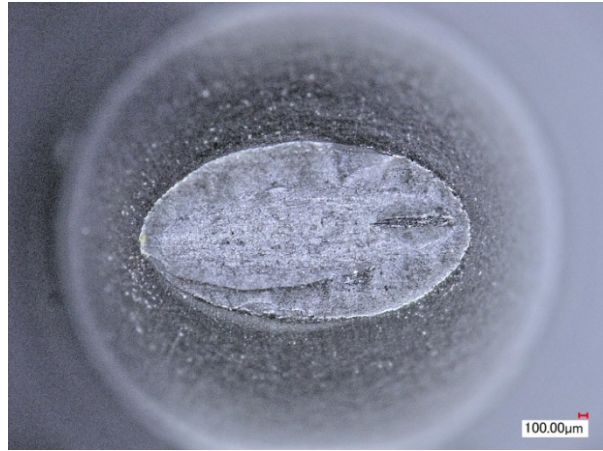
Fracture surface for expanded and strain-aged longitudinal tensile test specimen 180° from weld seam.
